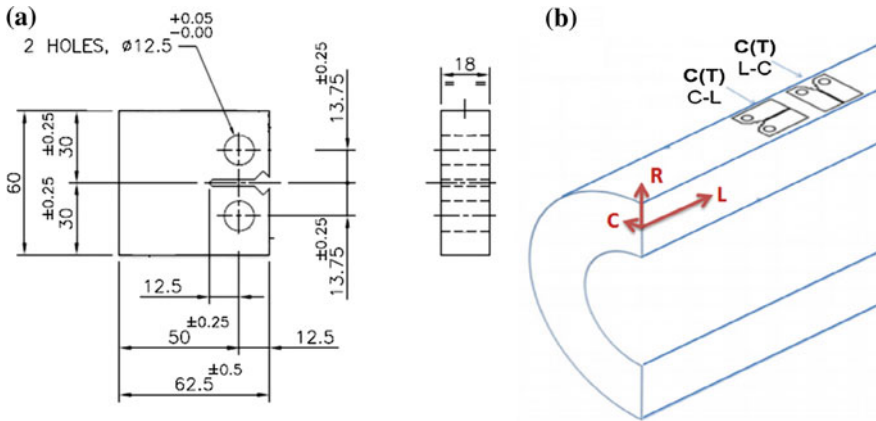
a Typical schematic of C(T) specimen and b layout of the C(T) specimen as machined from full-scale pipe of 324 mm OD and 25 mm thickness of Type 304L(N) material
